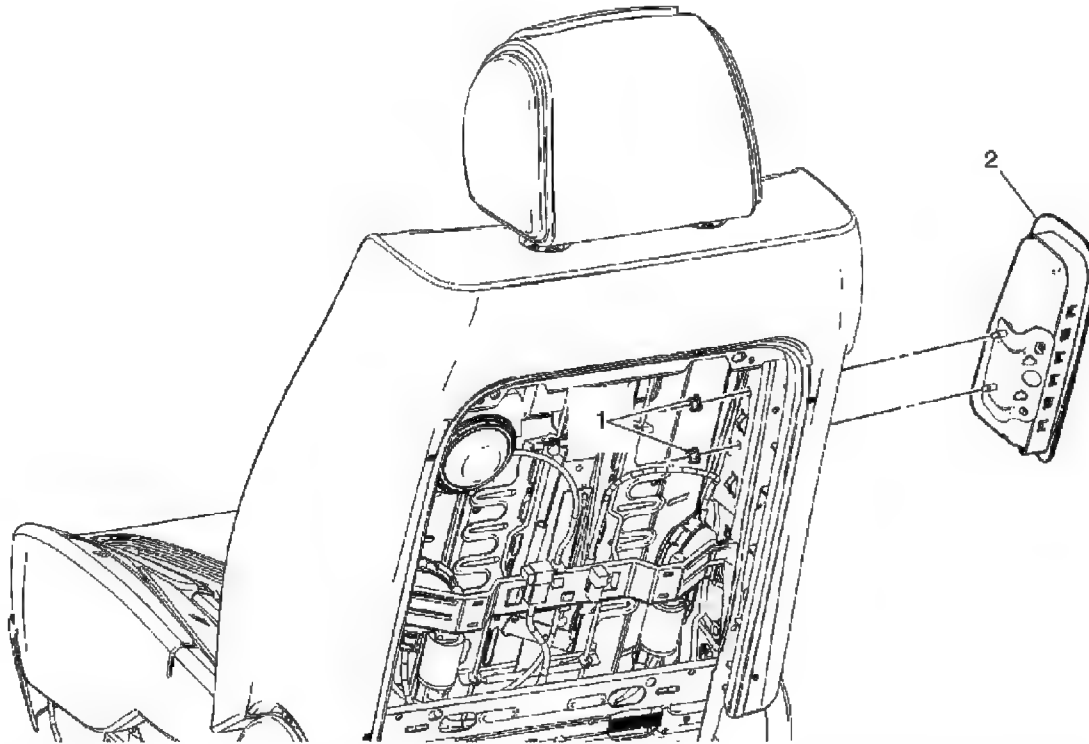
View Of Inflatable Restraint Side Impact Module Replacement - Front
